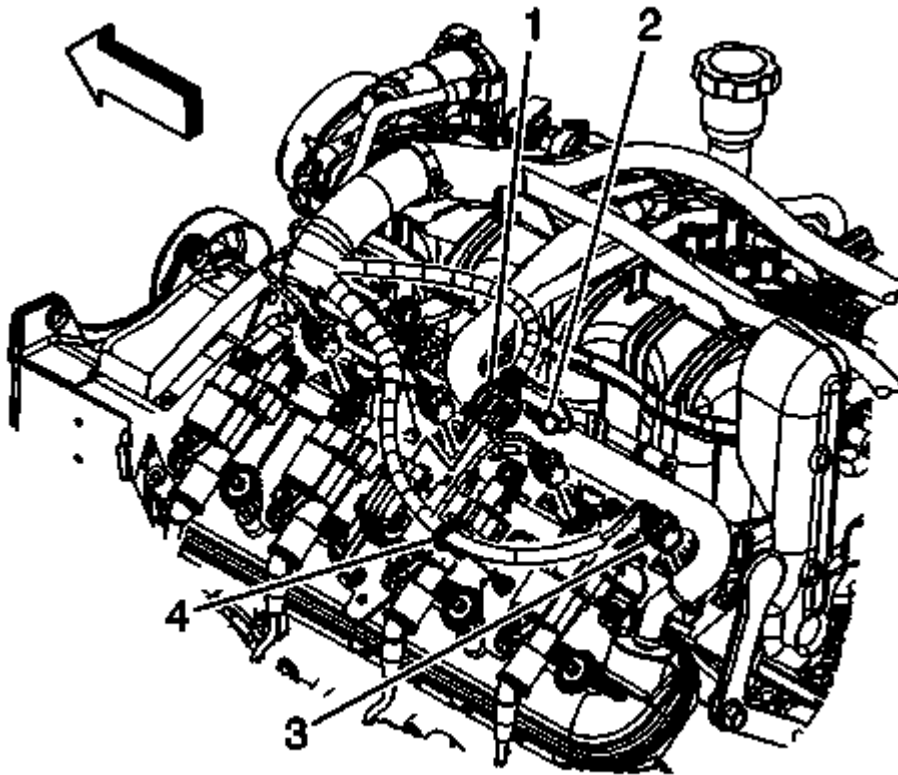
View Of Engine Harness Electrical Connectors & Inlet Hose Clamp
